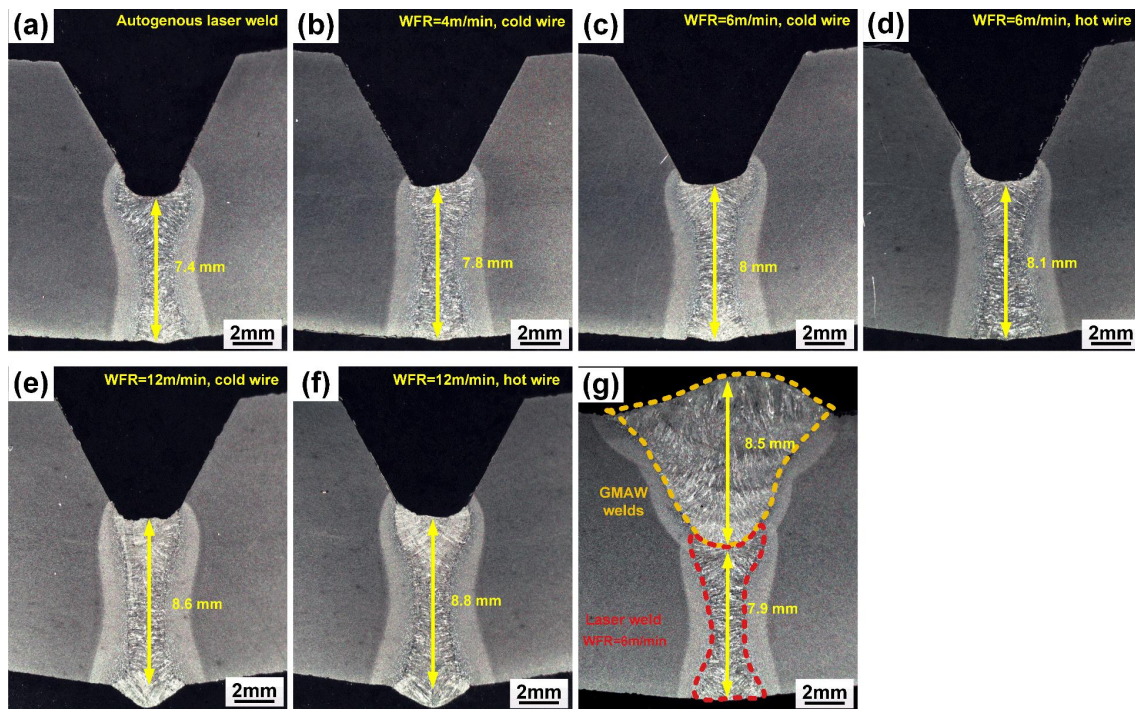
Cross-section morphologies: (a) autogenous laser weld; (b) cold-wire laser weld,  $WFR = 4\text{m/min}$ ; (c) cold-wire laser weld,  $WFR = 6\text{m/min}$ ; (d) hot-wire laser weld,  $WFR = 6\text{m/min}$ ; (e) cold-wire laser weld,  $WFR = 12\text{m/min}$ ; (f) hot-wire laser weld,  $WFR = 12\text{m/min}$ ; (g) final joint with root laser weld and filler GMAW welds.
